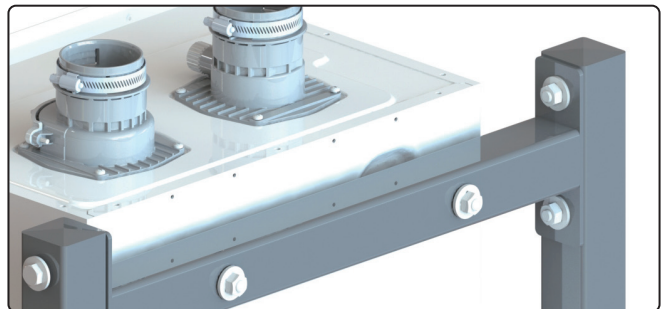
Single Appliance Mounted on Top Mounting Bracket
